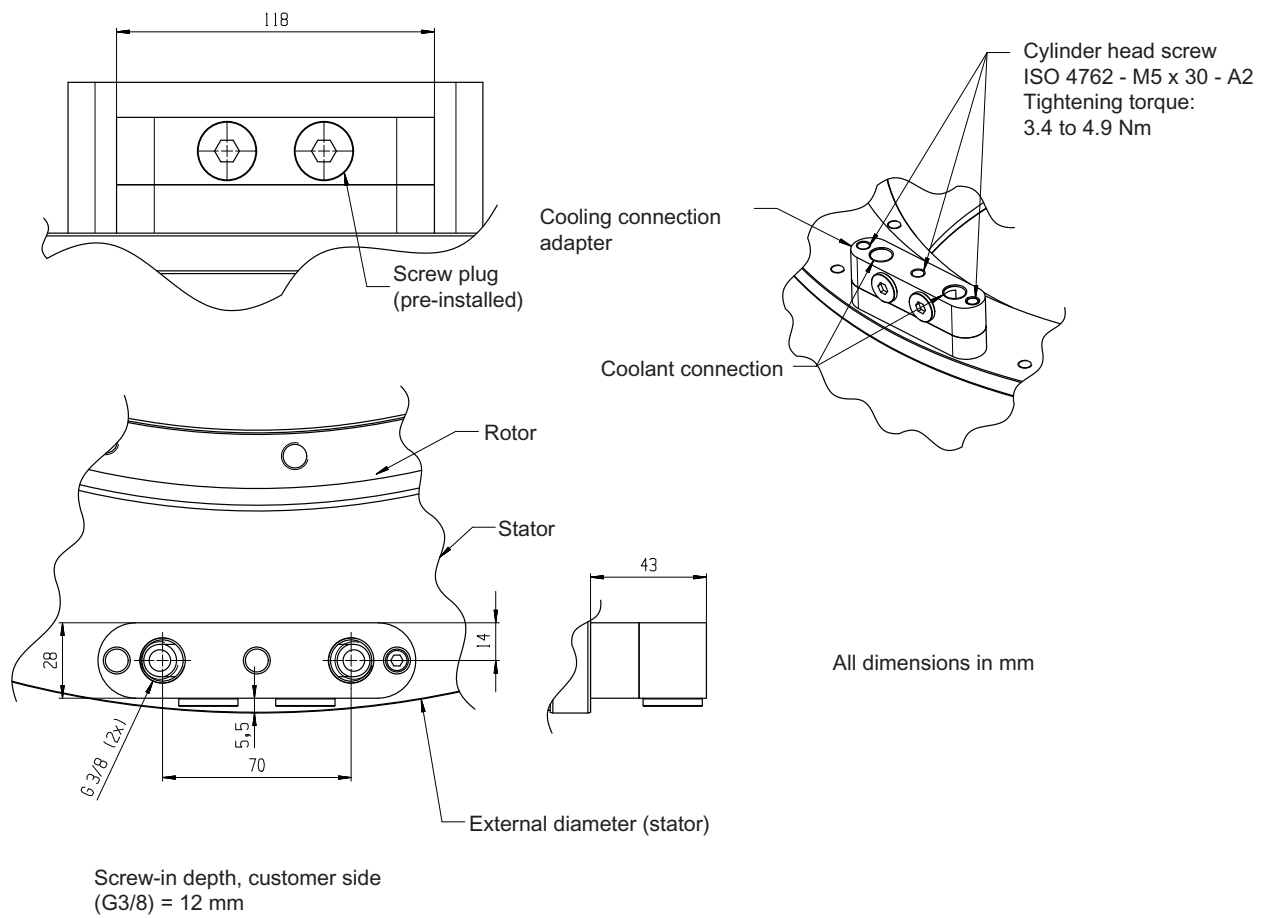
Axial cooler connection with cooling connection adapter (option) for 1FW629
